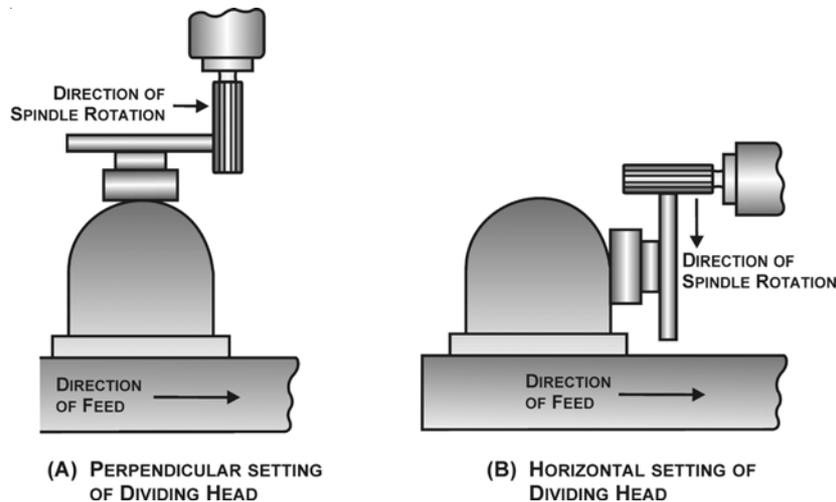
, Cam milling - perpendicular and parallel setting.
